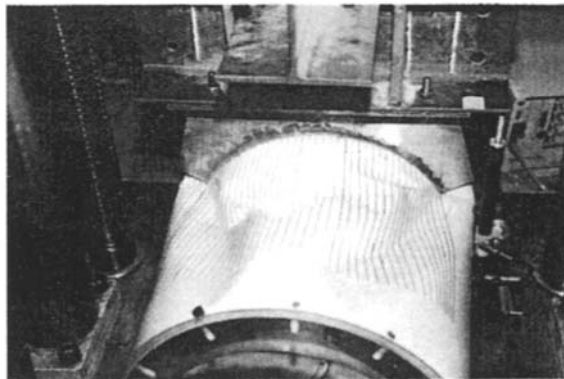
“Crumpled” buckle collapse of vessel with welded saddle (Vessel 7, $R/t = 455$)
